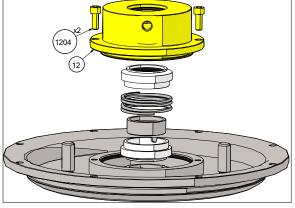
Remove the double mechanical seal chamber [120] and holding bolts [1204].
